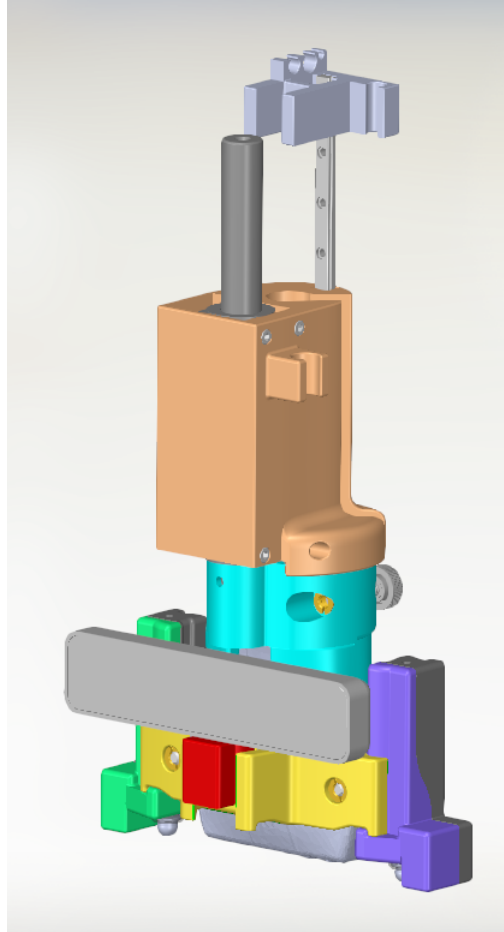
CAD assembly of all ultrasound probe attachments with GE 9L probe.
